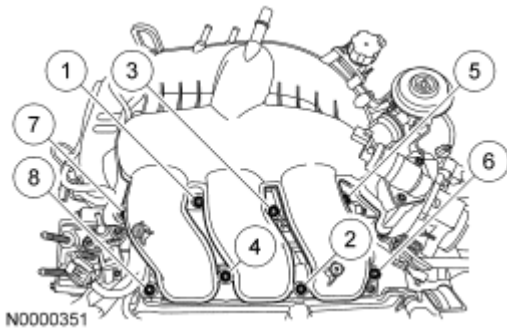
Identifying Tightening Sequence Of Upper Intake Manifold Bolts
